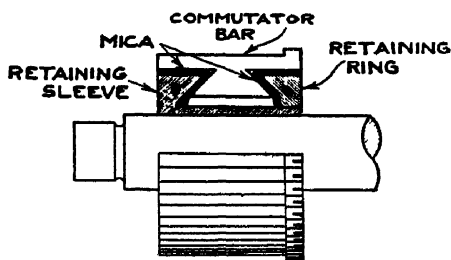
Sectional view of typical commutator showing methods of retaining and insulating the segments.
